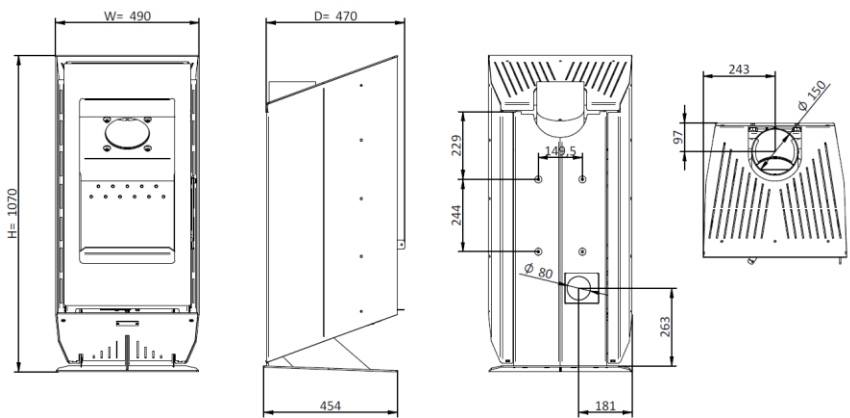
Dimensions of the wood stove Tek Wall Eco
